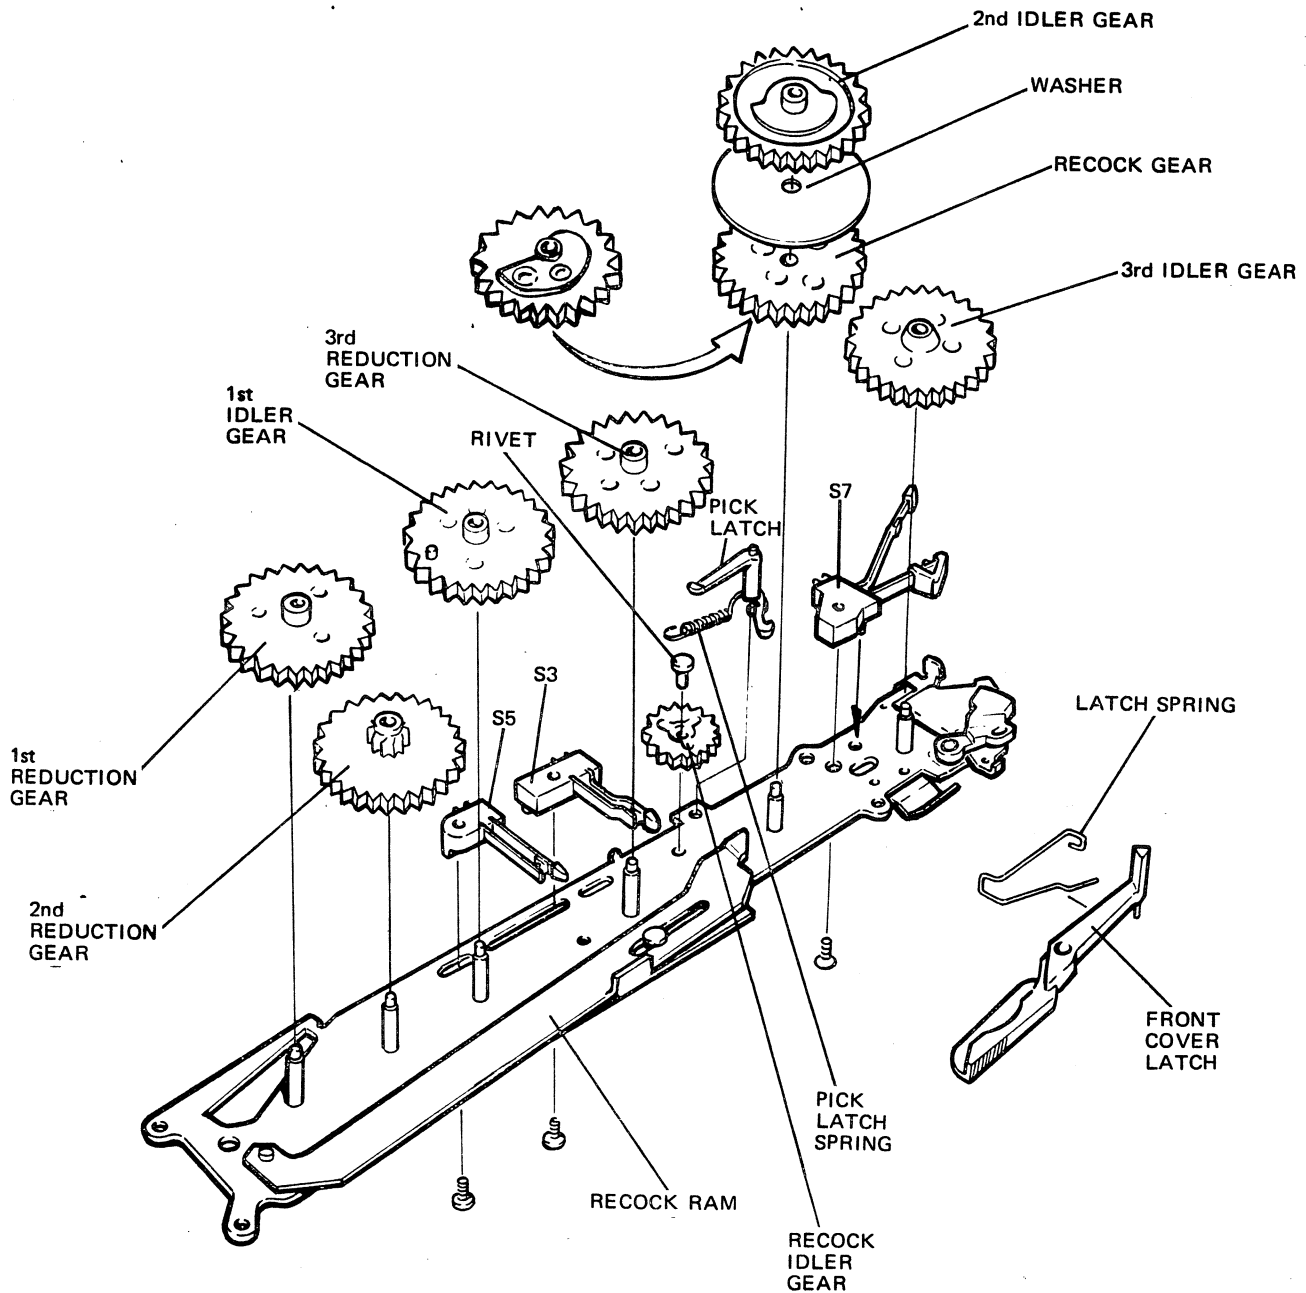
GEAR TRAIN, EXPLODED VIEW
